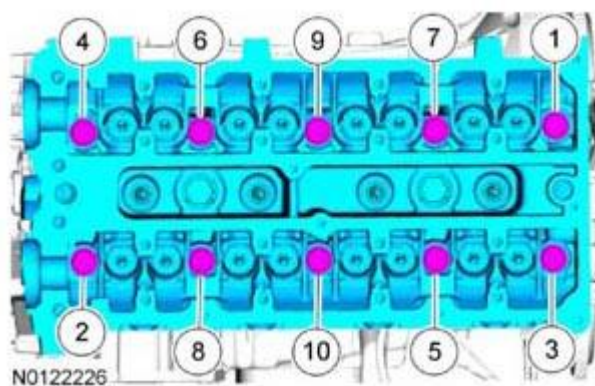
Identifying Cylinder Head Bolts In Sequence
